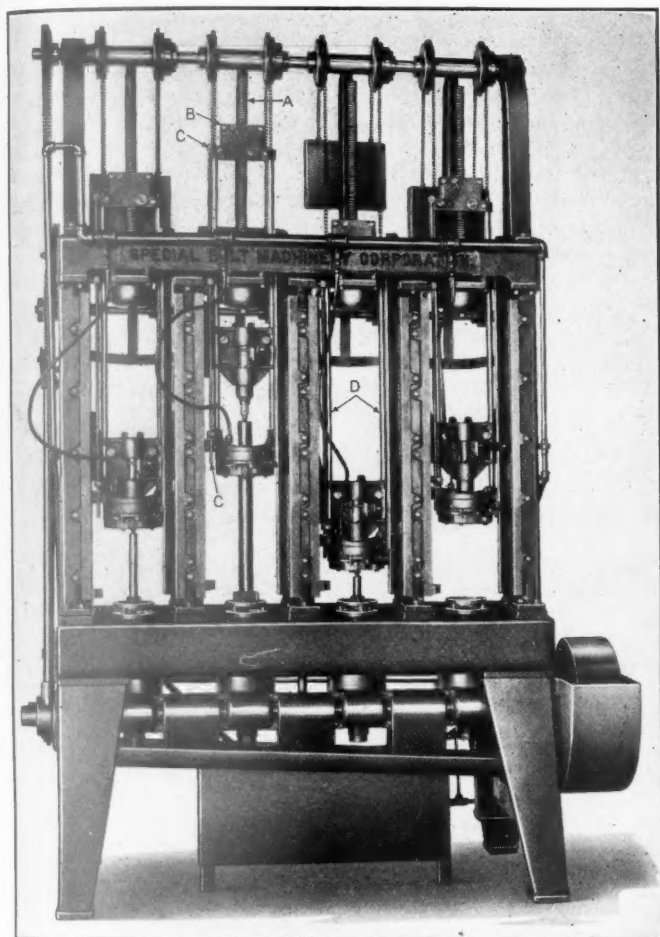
The Foster Bolt Turning Machine Designed to Turn Bolts on Centers from Forged Blanks
